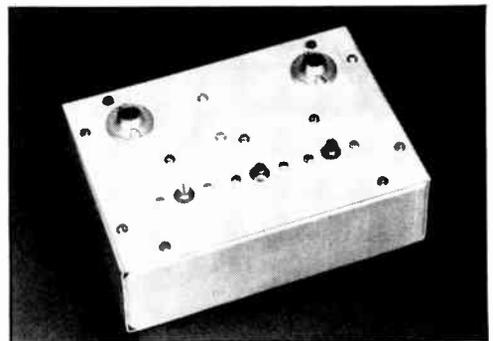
Television-frequency harmonic filter, for use with coax cable. All parts are mounted on a 5 × 7-inch piece of aluminum, mounted with sheet-metal screws in a 5 by 7 by 2 aluminum chassis which serves as a shield.
